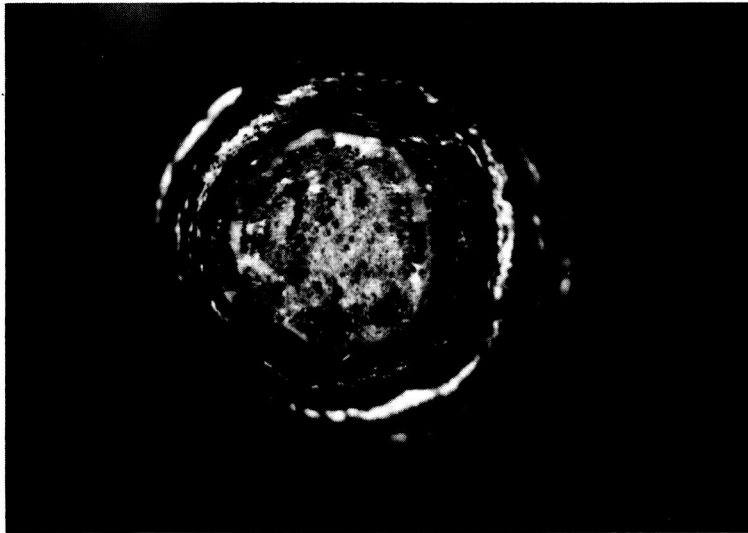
FRACTURE SURFACE OF ONE HALF OF SPECIMEN SHOWN IN FIG. 4. NOTE CAVITIES ON BASE OF DUCTILE CUP FRACTURE. (x 30).
